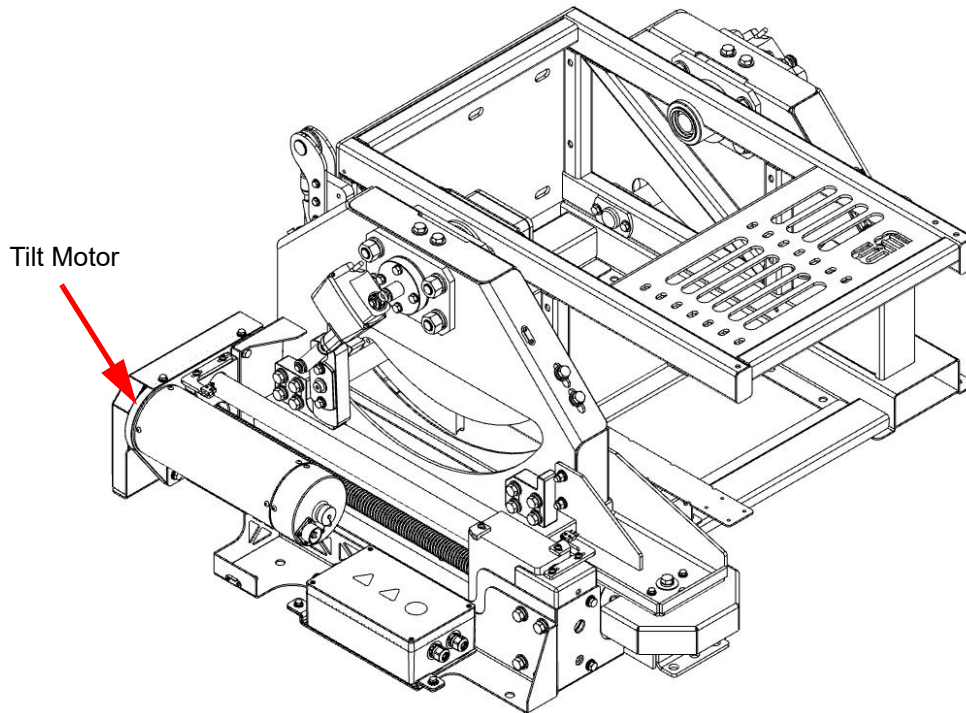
Tilt Motor (Cover Removed for Clarity)
